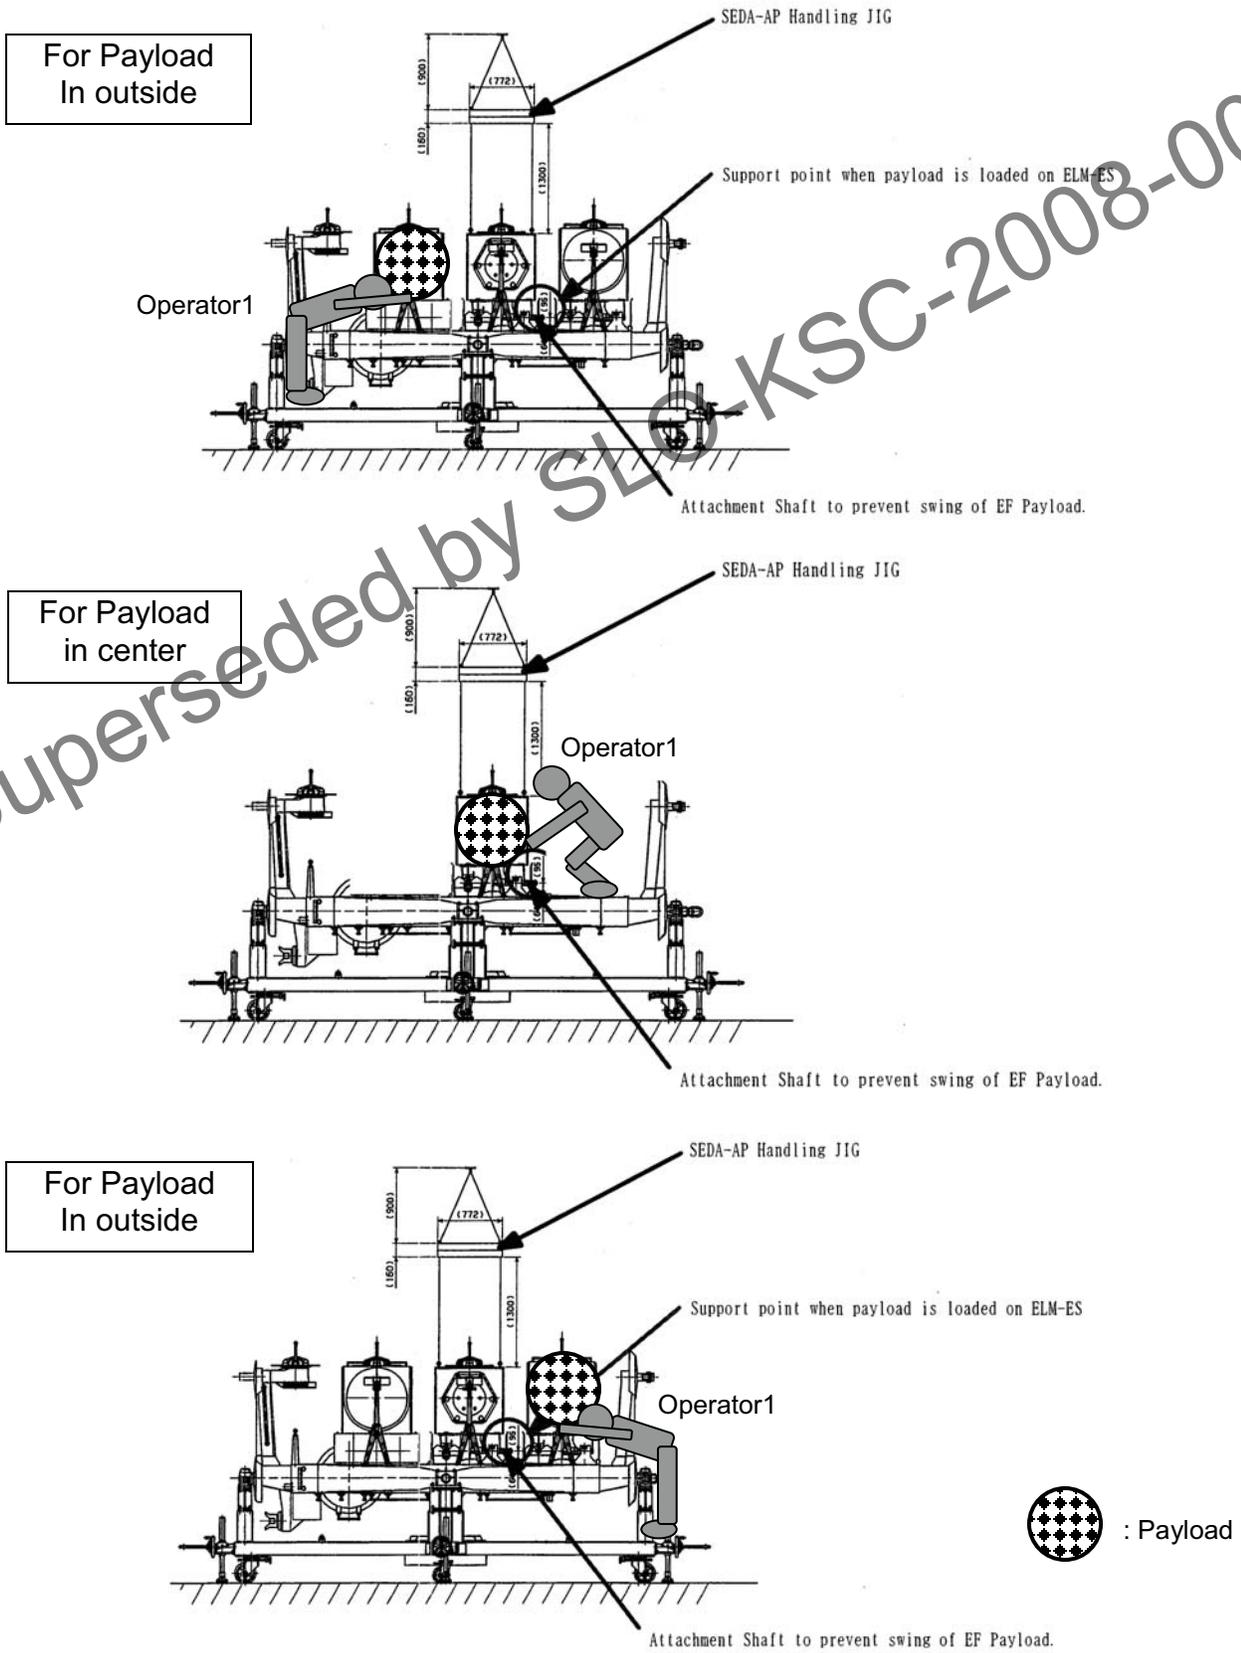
(2/2) Operator Layout EF Payload Installation
